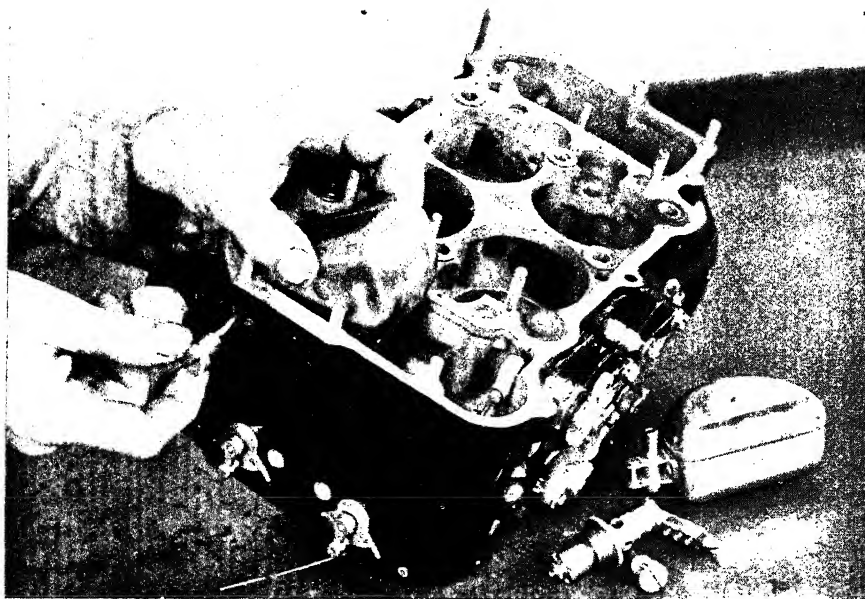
C.—SERVICING A STROMBERG CARBURETTOR (3)
